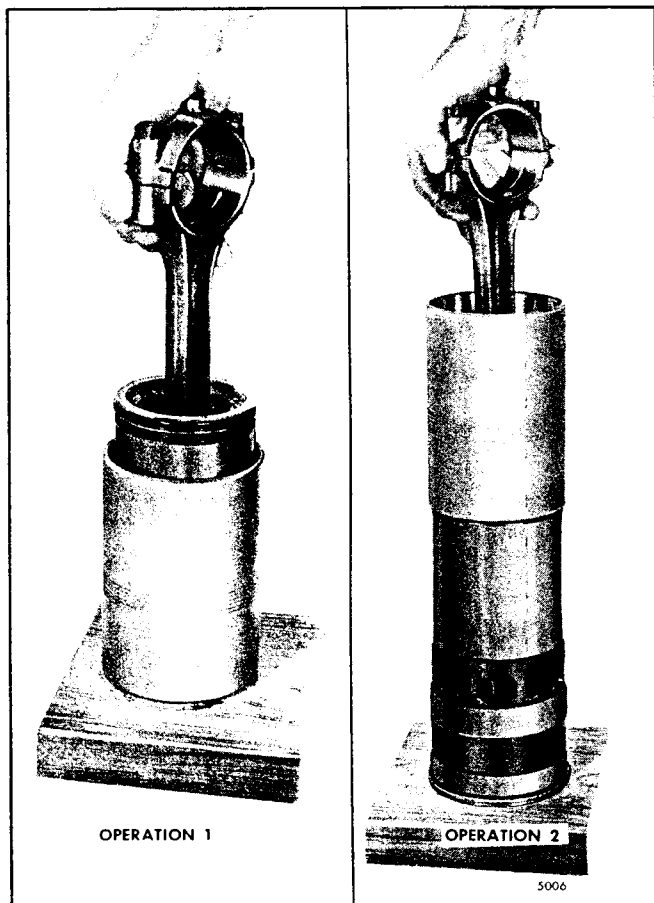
Installing Piston and Connecting Rod Assembly in Ring Compressor and Cylinder Liner
